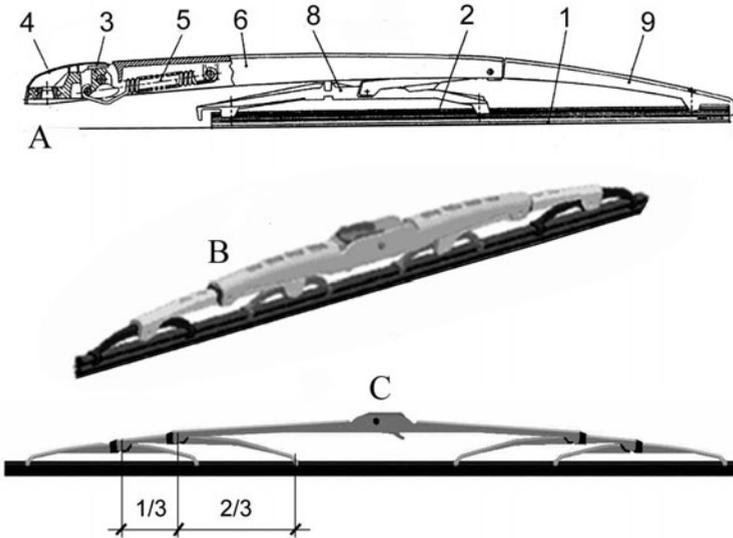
Parts of a wiper arm (A) and examples of different blade supporting systems (B, C). 1: blade; 2: blade housing; 3: joint; 4: clamp; 5: spring; 6: arm body; 8: internal bow; 9: external bow.
